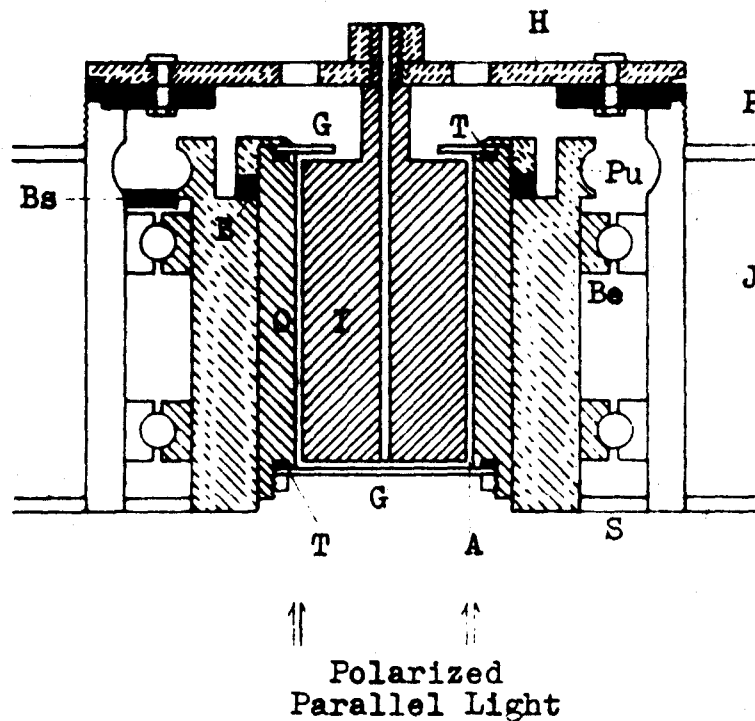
A Cross-sectional Sketch of Modified Cylinder Assembly
